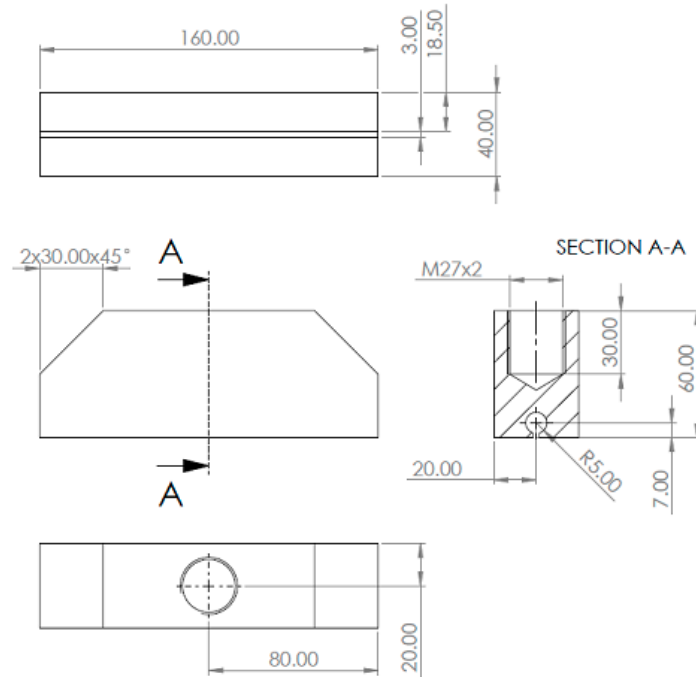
Designed clamping system for tensile uniaxial machine. All dimensions are in mm.
